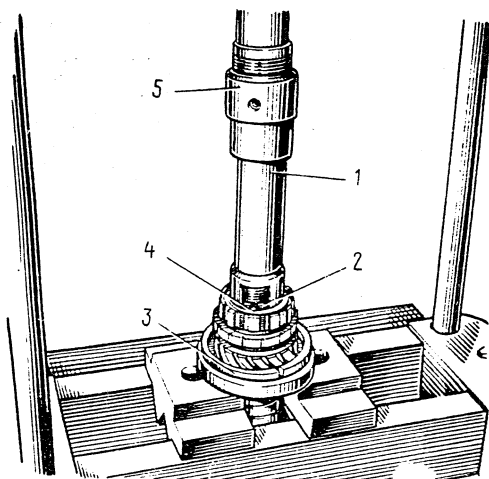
Installing the Main Shaft Locking Ring:
